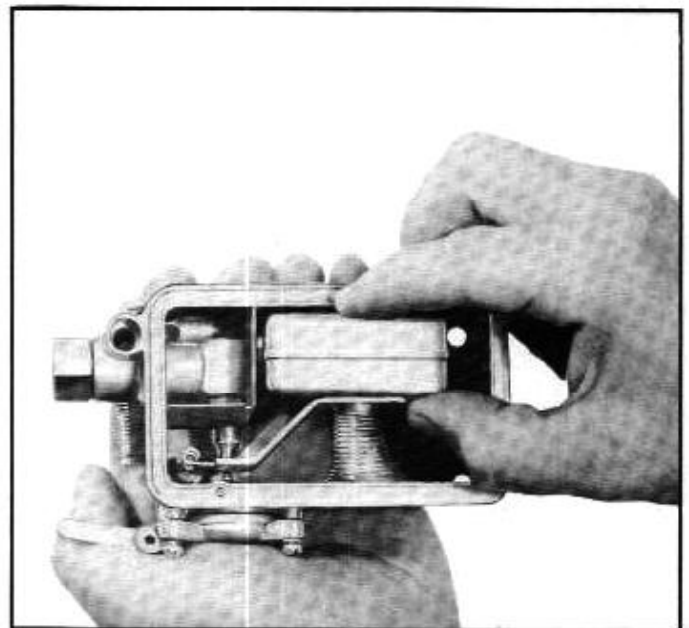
D-24—Removing Primary Float and Hinge Retainer
